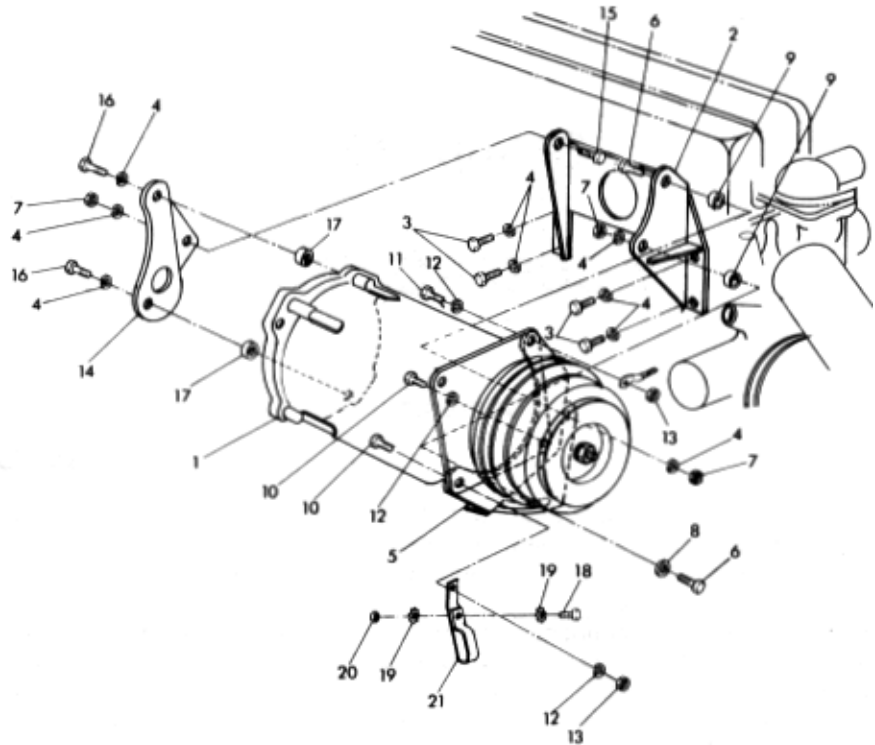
Air Conditioning Compressor and Mounting, 6 Cylinder Engine
